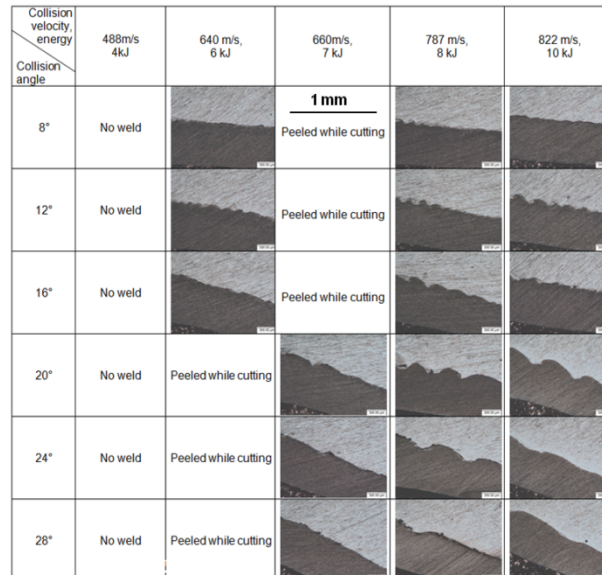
Weld morphology map of AA6061-T4/AM60B, obtained by PDV and grooved target plates
